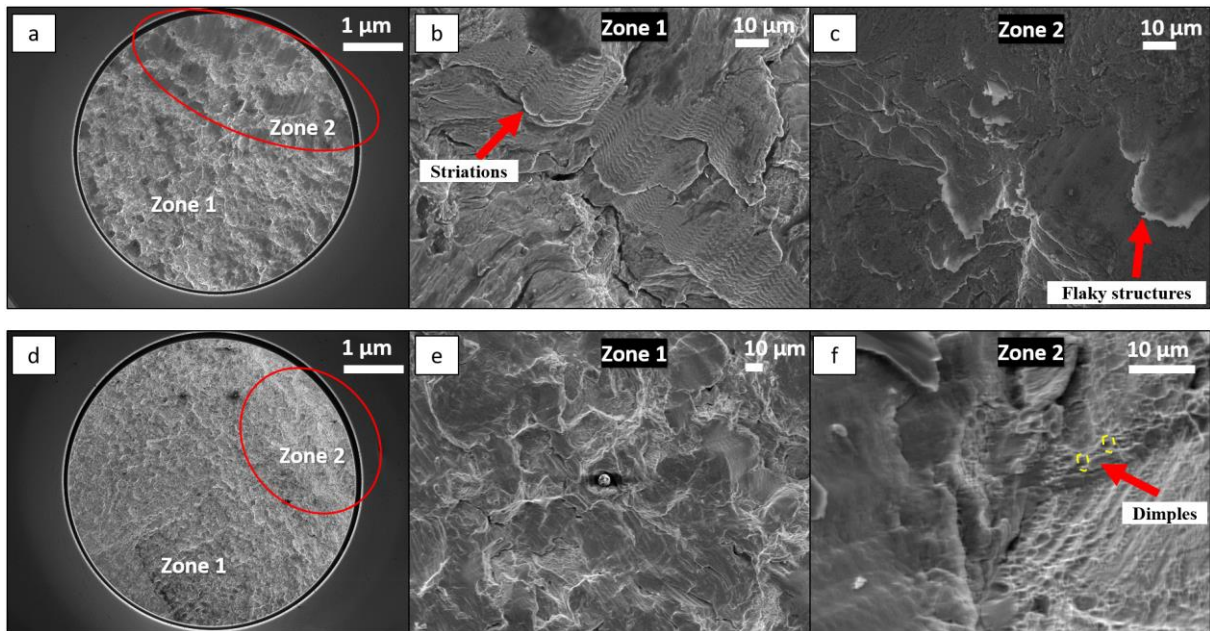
SEM observations of: (a) larger view of fracture surface of high cycle fatigue of reused powder specimen using SEM; (b) magnified zone 1 showing striations; (c) magnified zone 2 with flakes; (d) fracture surface of high cycle fatigued as-received powder specimen; (e) striations in magnified 'zone 1' and (f) parallel strips of ductile dimples in magnified zone 2 of as-received powder LPBF specimen.
